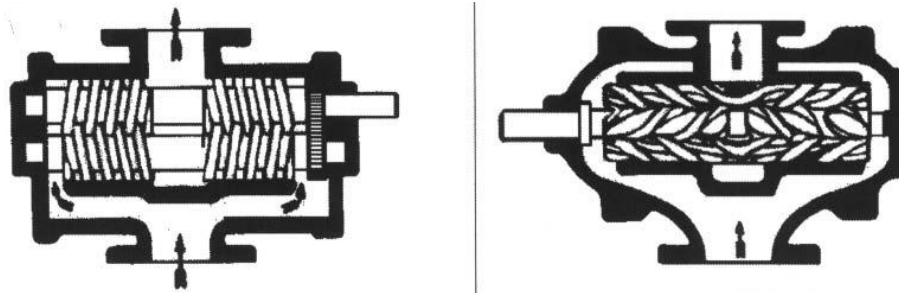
a: Two-screw pump (left) and Three-screw pump (right)
